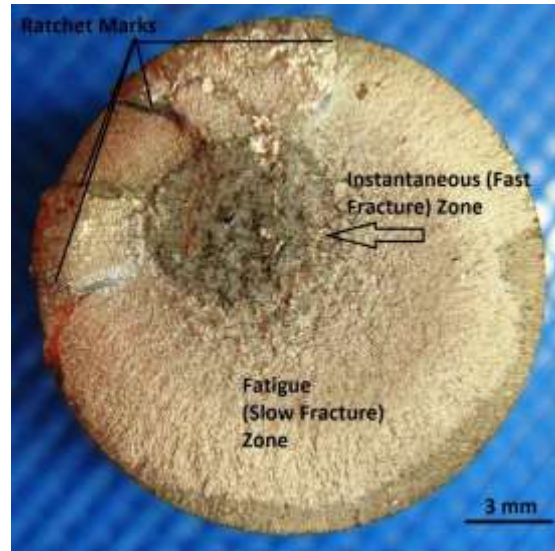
Surface features of a non-clad mild steel fatigue sample
